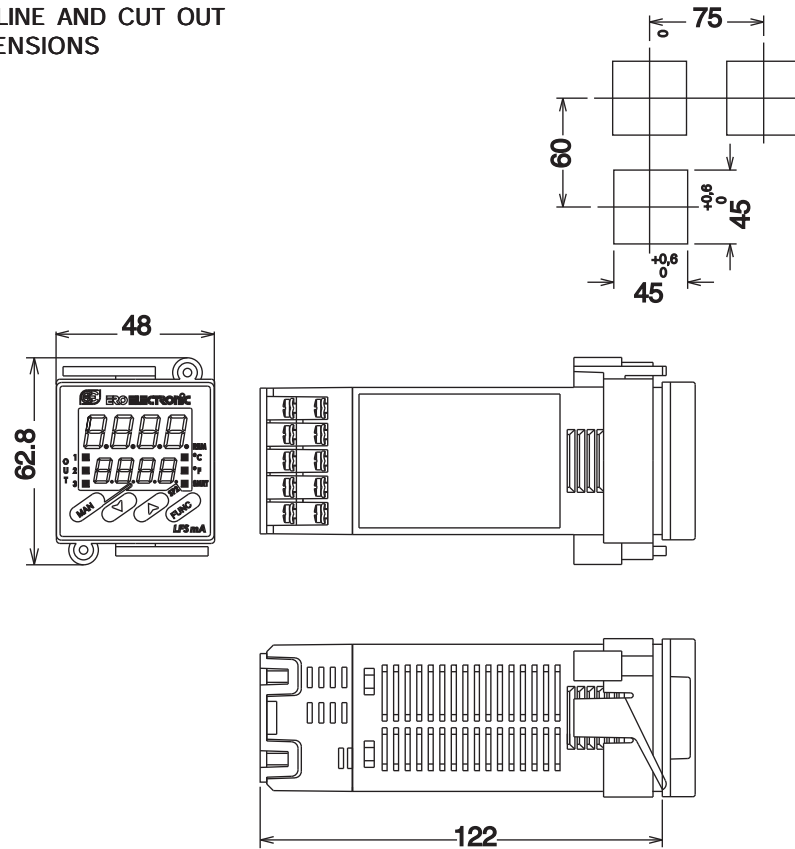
OUTLINE AND CUT-OUT DIMENSIONS
